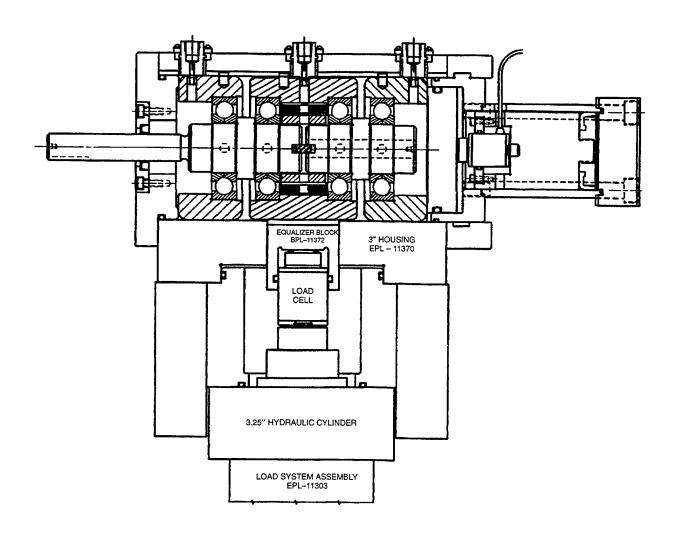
Schematic of the Endurance Testing Bearing Test Rig.
